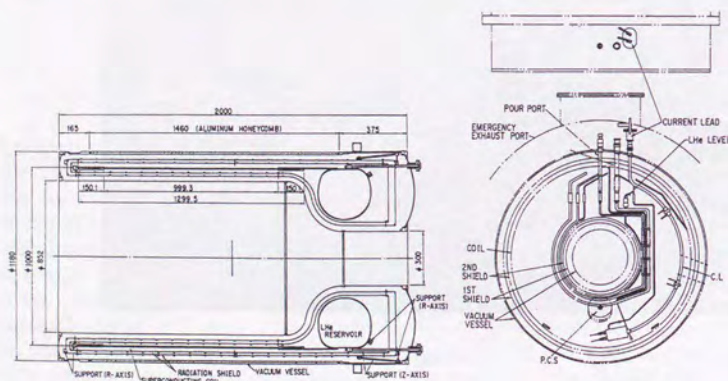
Cross-sectional view of the superconducting solenoidal magnet.
